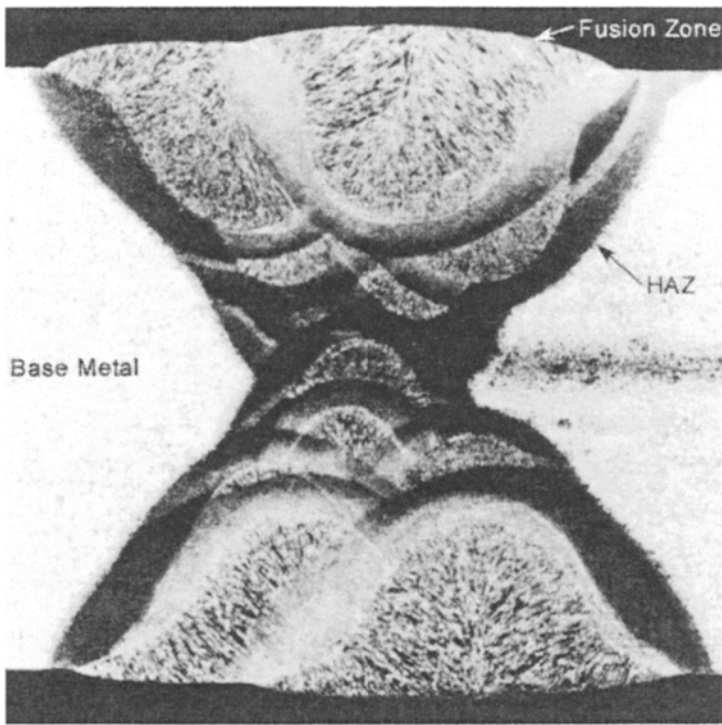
Cross-section of multipass electric arc weld to join two mild steel plates.
